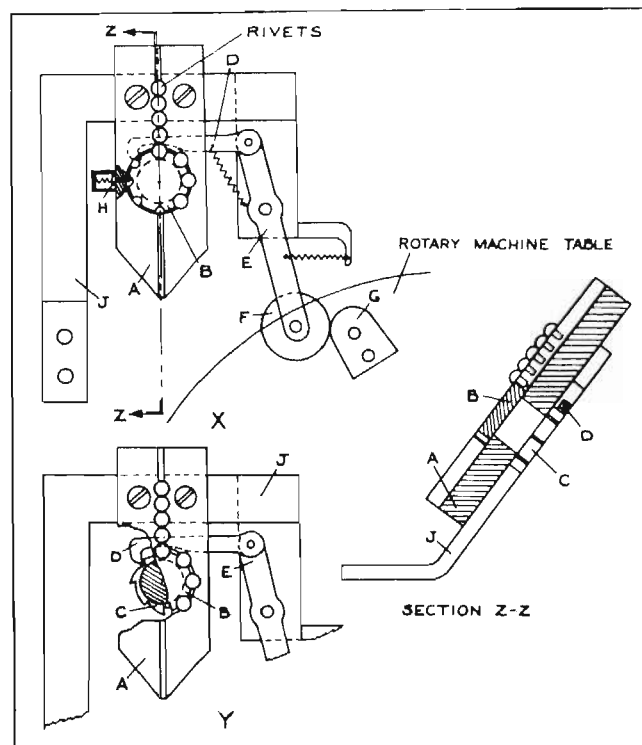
Feeding device synchronizes rivet flow with rotation of the machine table.
